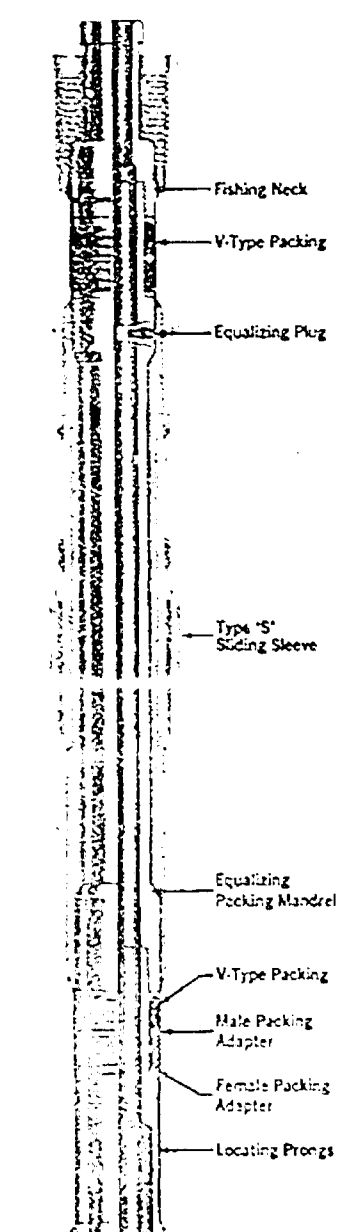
PSI TYPE "S" SEPARATION SLEEVE Product No. 810-02
